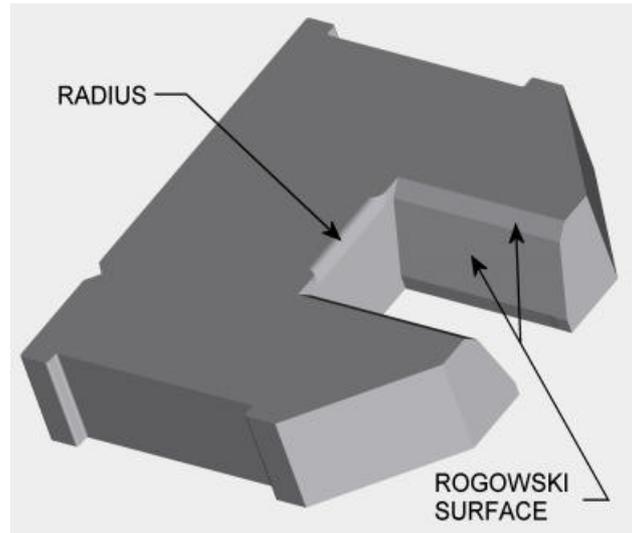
Storage ring injection septum and synchrotron extraction septum end pack.
